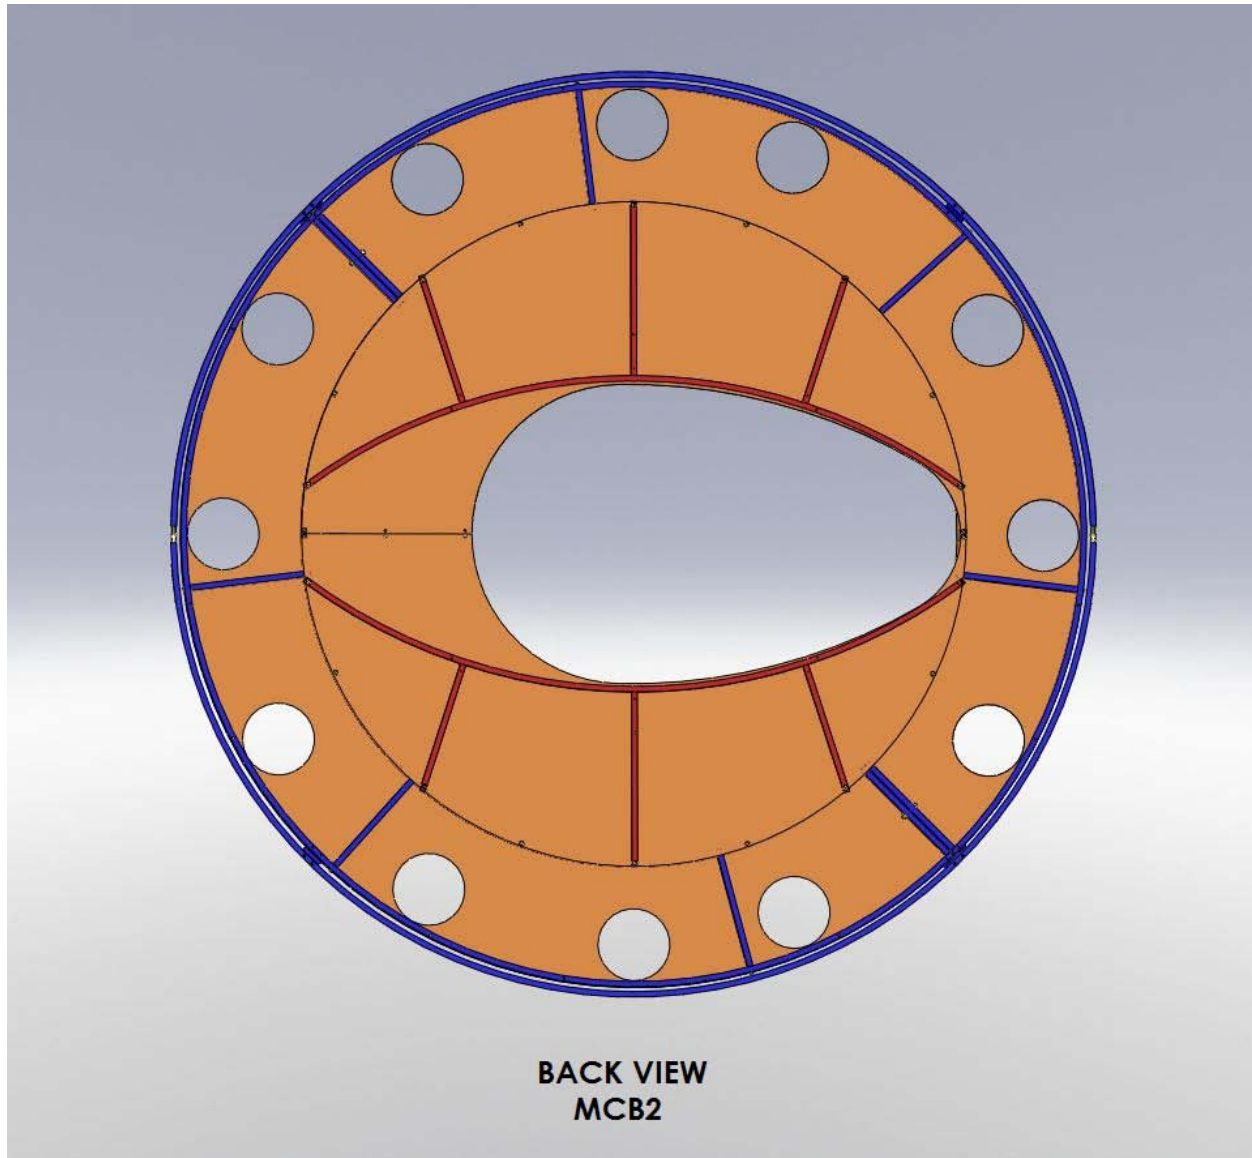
Back View of MCB2 Mode Cleaner Tube Baffle
